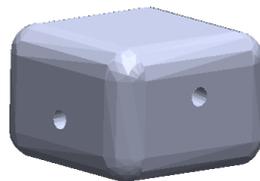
Design in SolidWorks of an ABS piece for rods fixing.
